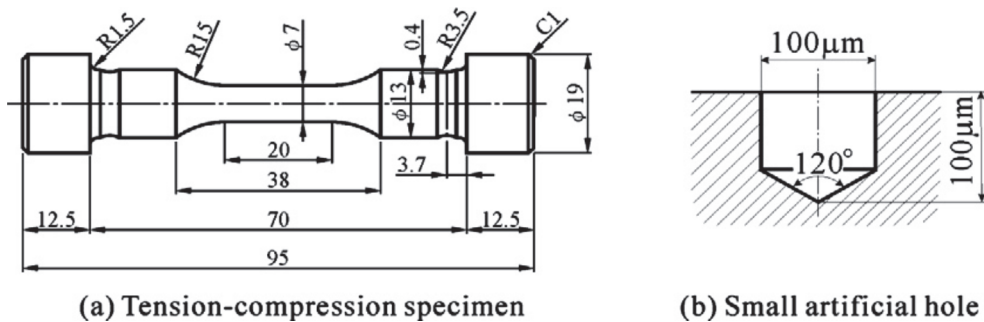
Geometry and dimensions of fatigue test specimens, in mm
